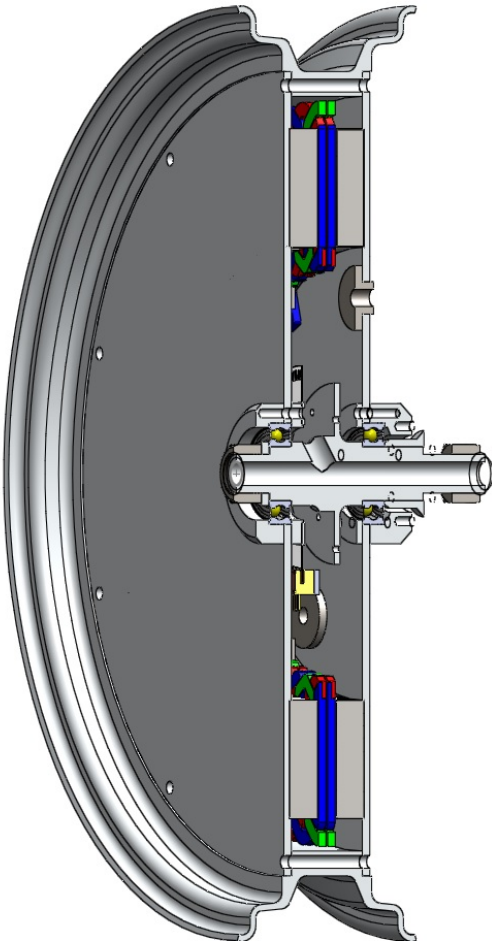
SolidWorks Section View of DNV Fuel Fighter Motor
